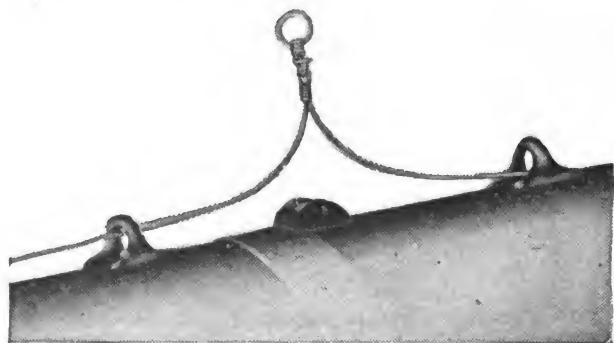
Welded-on hoisting and suspension lugs of a 500-lb. Navy bomb. The hoisting lug is in the center.
